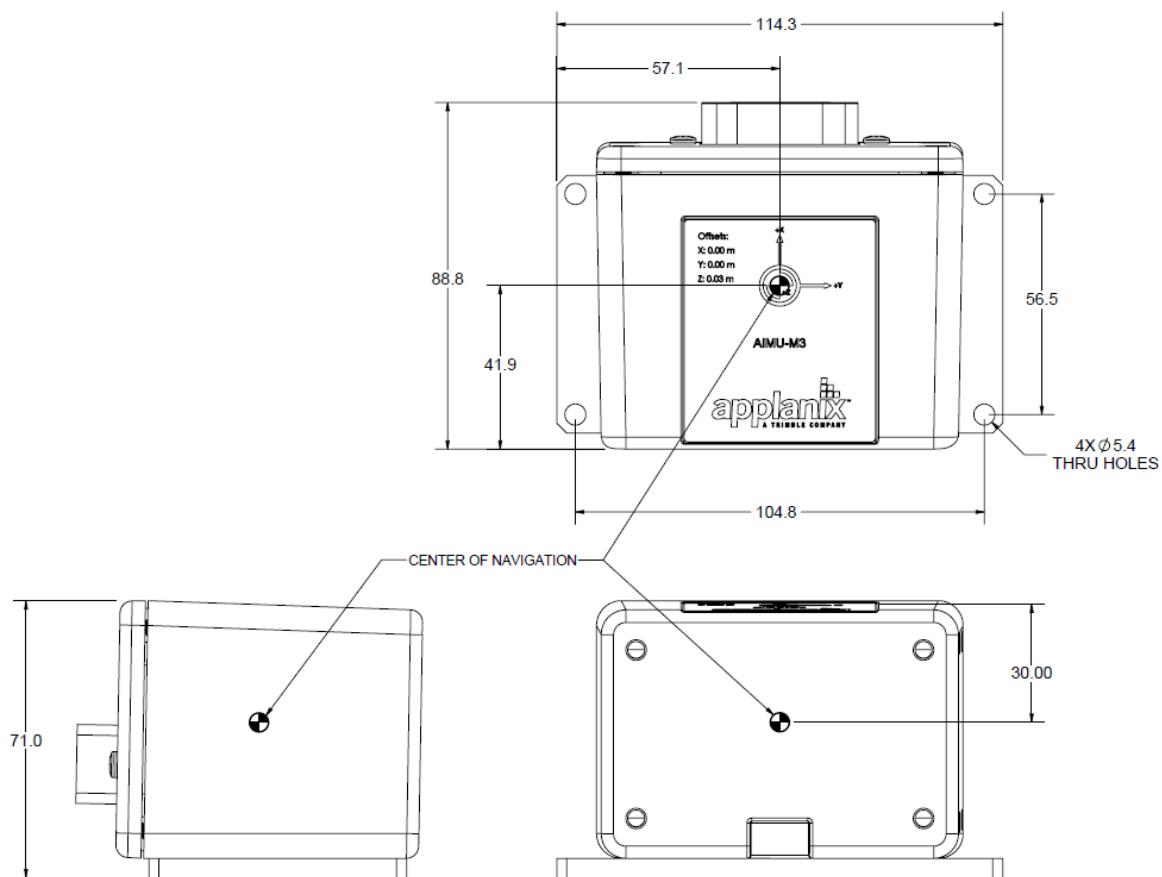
IMU Type 55 & 56 Outline, Mounting and Sensing Centre Diagram
